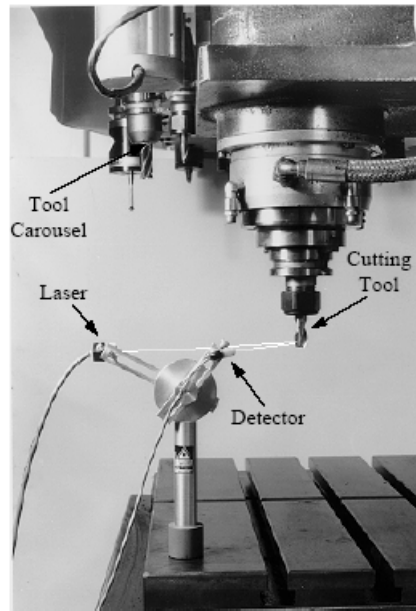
Close Up of Cutting Tool Inspection System
